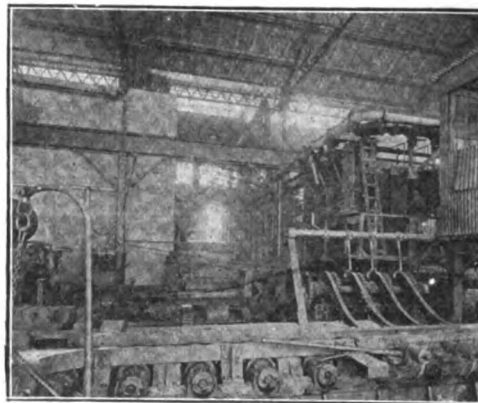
(above) is a view of the Westinghouse reversing mill motor, which was designed and built especially for this installation.
